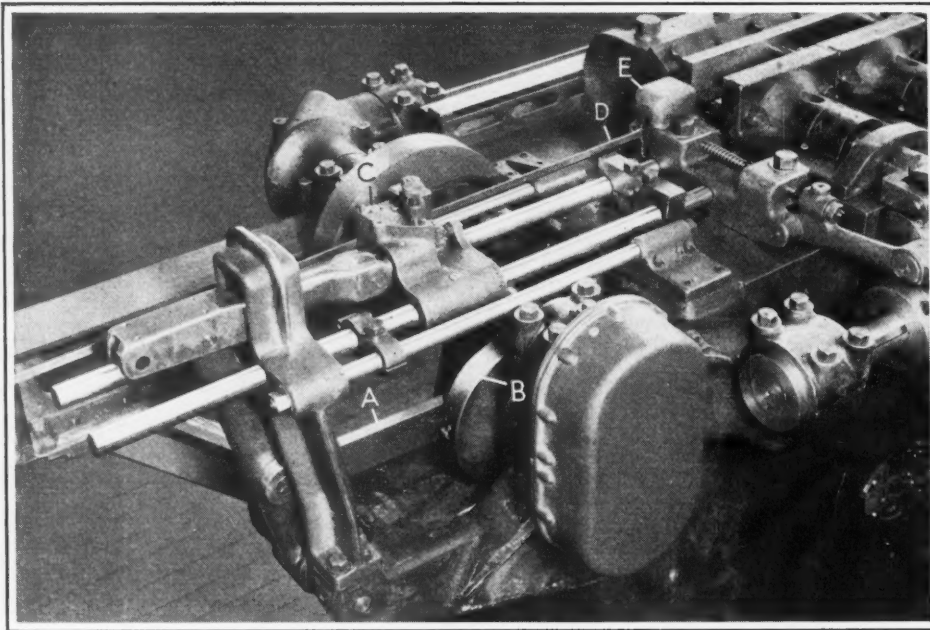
Stock Feeding and Clamping Mechanisms of Multi-slide Machine
